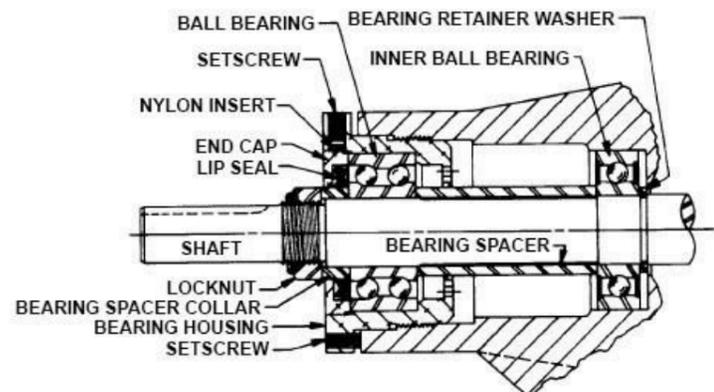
Thrust bearing assembly G-AS, G-AK and G-AL models.
